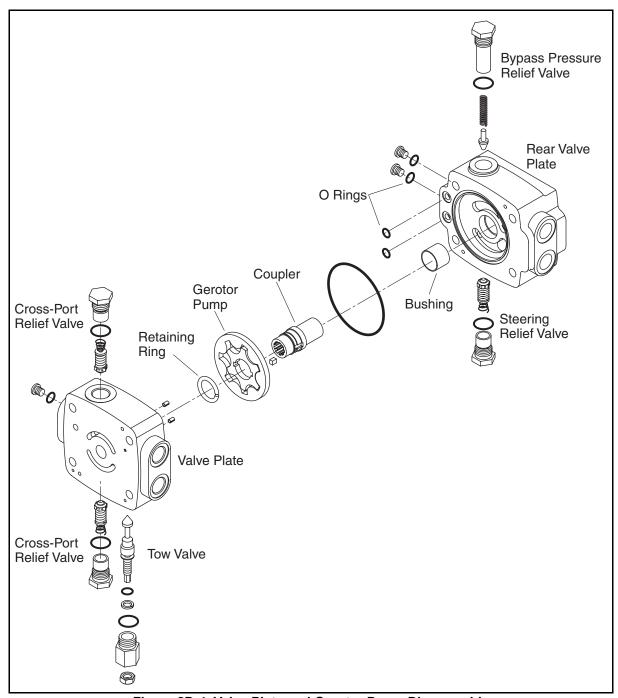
D-4. Valve Plate and Gerotor Pump Disassembly
